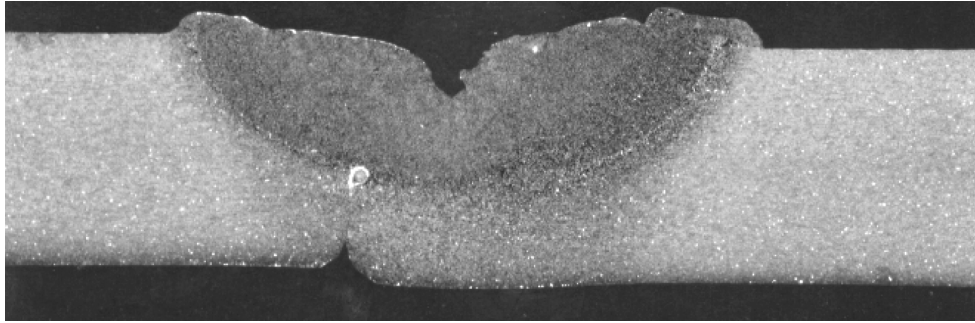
Al 5456 square groove weld (sample 2-6-B-3), $\times 12.5$.
